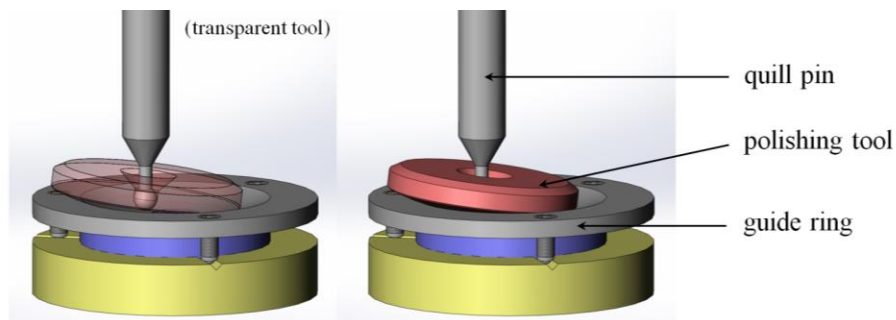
Solid model assembly of 80mm radius phase fiducial tooling with the polishing machine quill pin installed. The quill pin translated left to right from this viewpoint while the substrate is driven about a spindle axis near the centerline of the guide ring.
